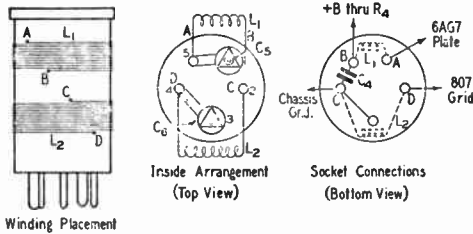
Details of the bandpass couplers. The trimmer condensers are soldered inside of the coil form, as described in the text, making a simple, compact plug-in assembly that needs adjustment only once.
